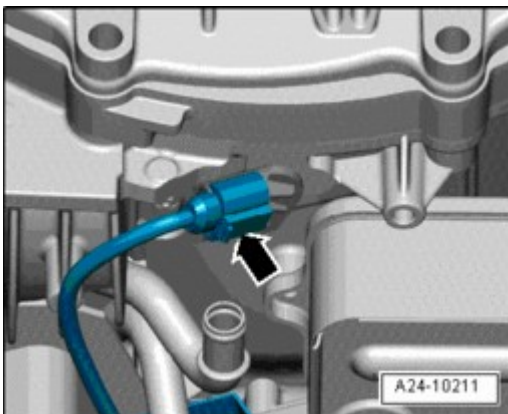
Disconnecting Electrical Connector On Engine Speed (RPM) Sensor G28
